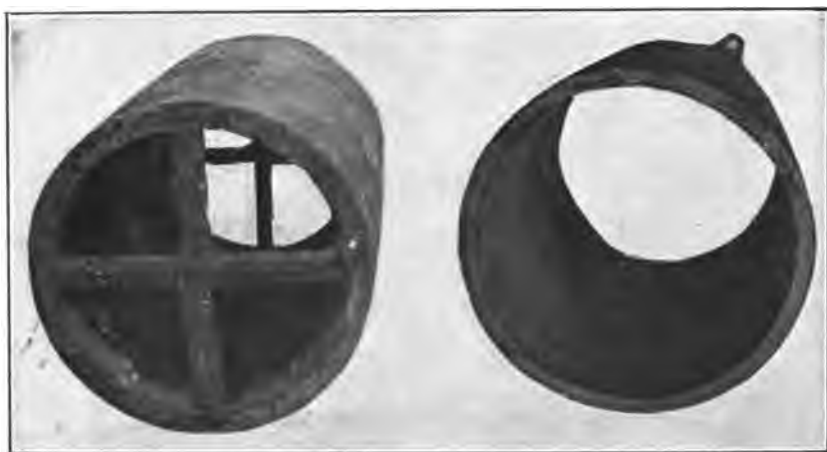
OLD AND NEW PATTERNS OF CYLINDER BUSHINGS. THE FORMER WAS DESIGNED WITH CROSS-IRONS FOR TURNING UP IN A LATHE BEFORE BORING. THE LATTER CAN BE BORED FIRST AND TURNED UP ON A MANDREL IN A LATHE LATER. NOTE THE SAVING IN STOCK AND MACHINING BY THE INTELLIGENT DESIGN OF PATTERNS.
